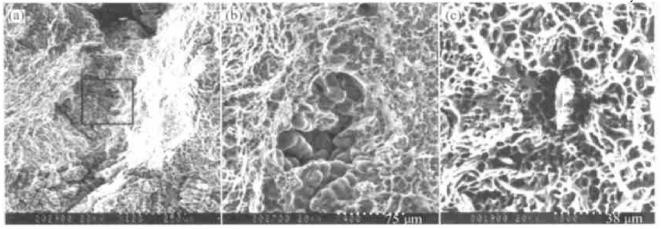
Fracture surfaces of fresh A356 tensile tested sample after filtration (256.0 MPa, 3.69%)
